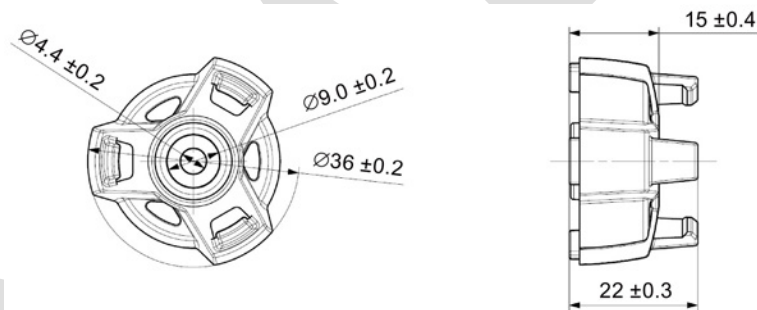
Dimension drawing of spacer 6GT2690-0AK00
